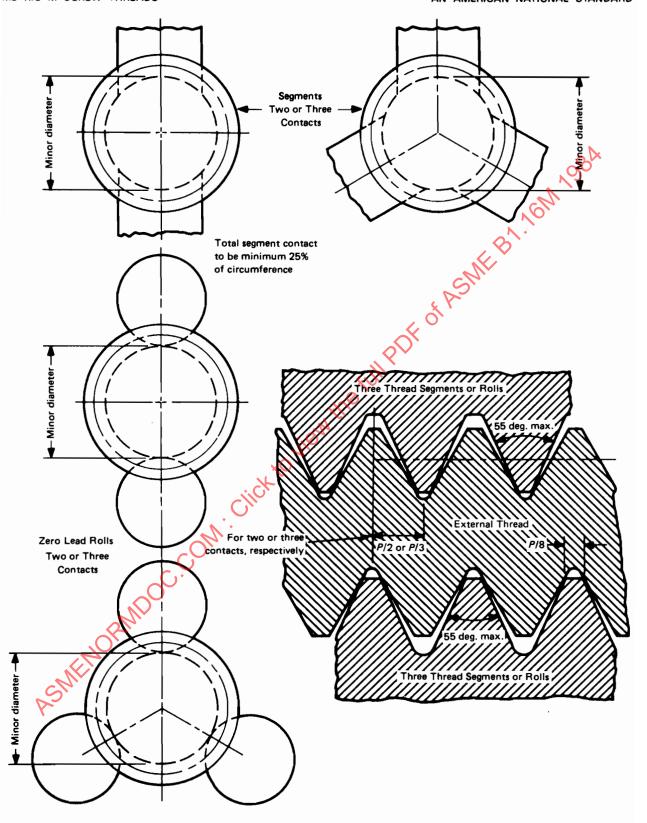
INDICATING DIAMETER GAGES—MAX.-MIN.
